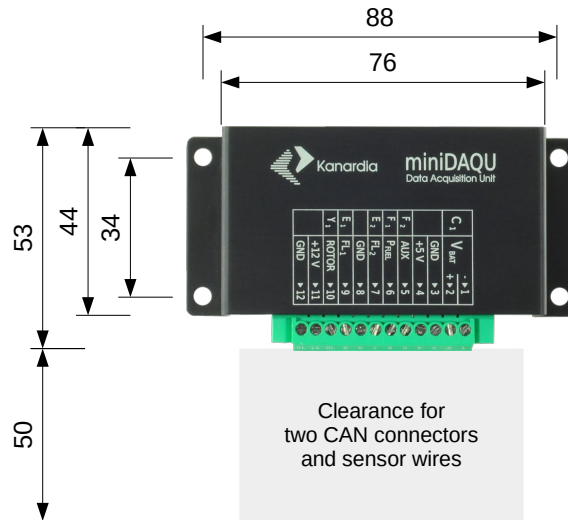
Dimensions and connection clearance of mini Daqu – Top View.
